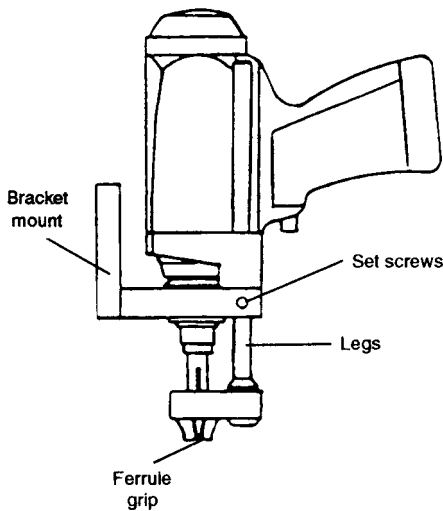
Inexpensive method of mounting portable hand gun to machine slide or drill press to obtain fixed-position accuracy
